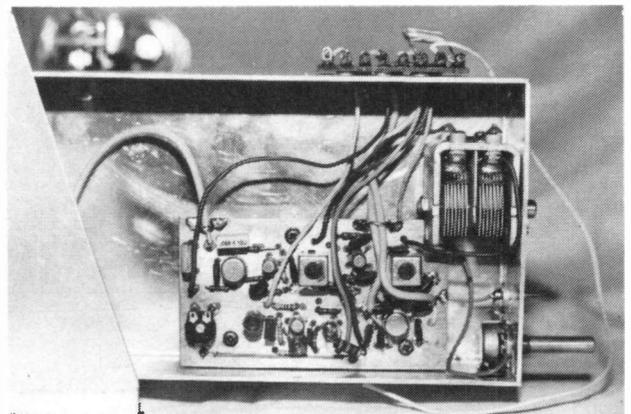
"WHITFIELD" MIXER DRIVER (PCB4) COMPONENT LAYOUT
